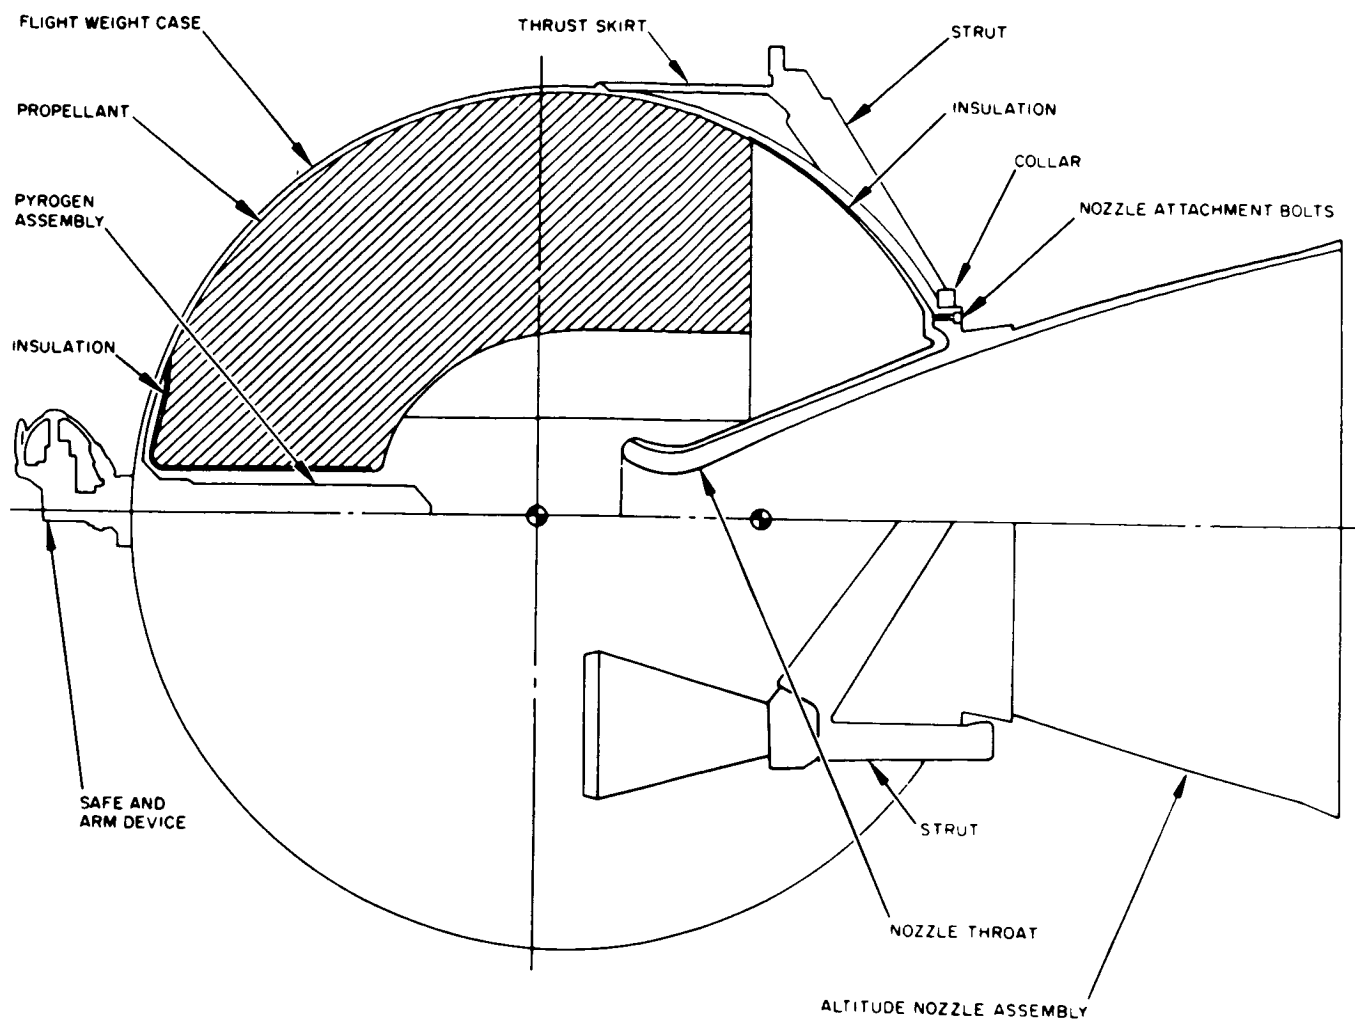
RETRO-ROCKET ASSEMBLY
